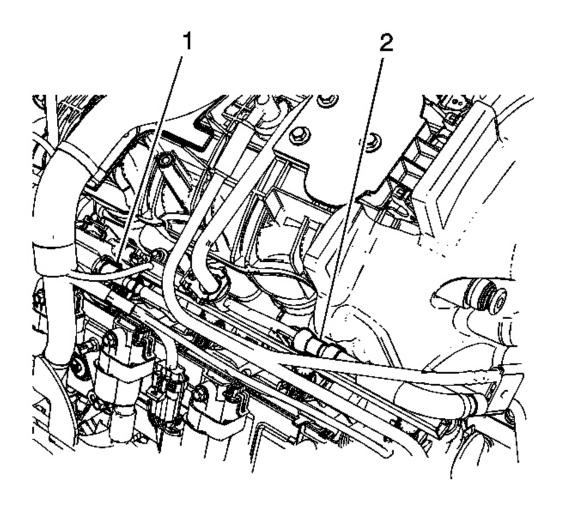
EVAP Canister Purge Tube Courtesy of GENERAL MOTORS CORP.
